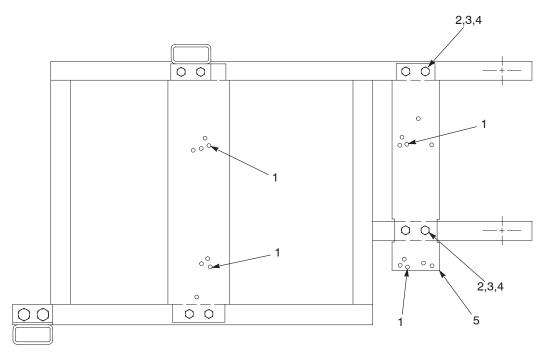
Series 3400 and 3500 mounting bracket bolt pattern
